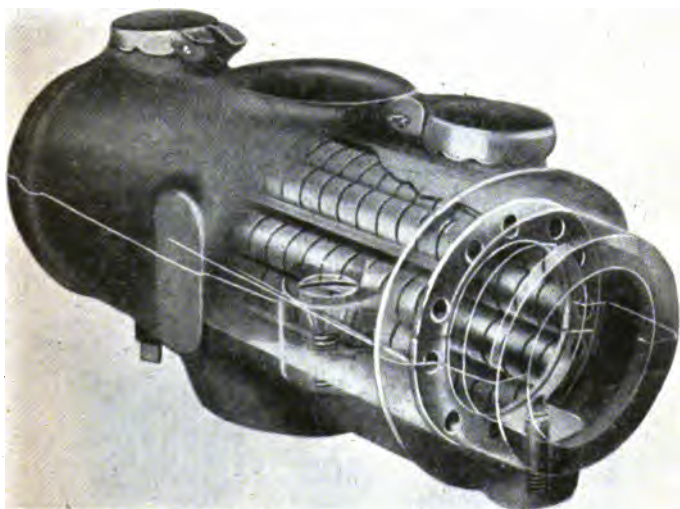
SEC. 7c.—Hyatt line shaft, roller bearing.
